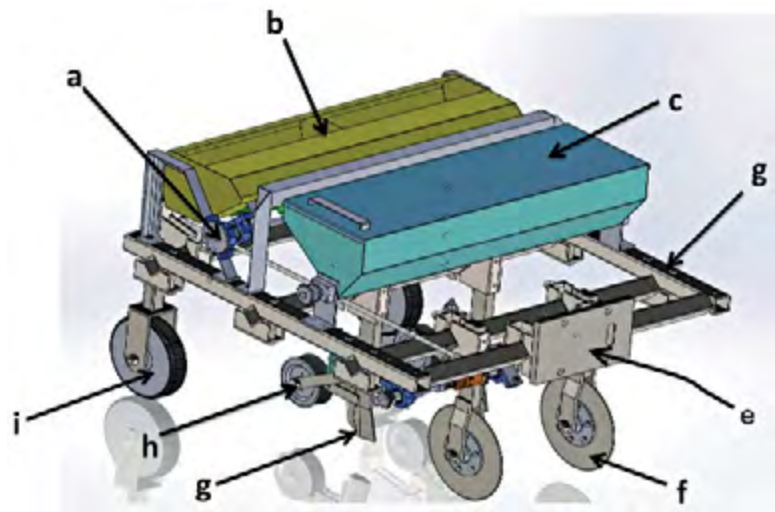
Parts of Zero till planter. a) Drive sprockets b) Seed hopper c) Fertiliser hopper d) Toolbar mounting e) Hitch f) Cutting disc/coulters g) Furrow opener h) Soil compacting wheel i) Depth control wheel/transport wheel.
